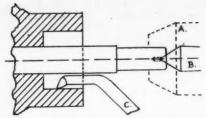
Truing the commutator of a Delco motor used on Frigidaire units. A—shows the adjustable support bushing being used where no center hole is drilled in shaft. B—Use steady rest to drill center hole in armature shaft and use tail stock center to support shaft. C—Bent Boring tool for truing commutator.
